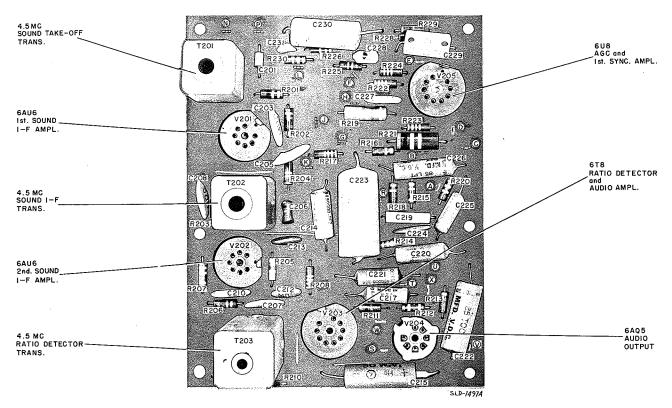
Top View, Printed Circuit Board, PW-200, CTC5N-Sound I-F, Audio, AGC, 1st Sync.
